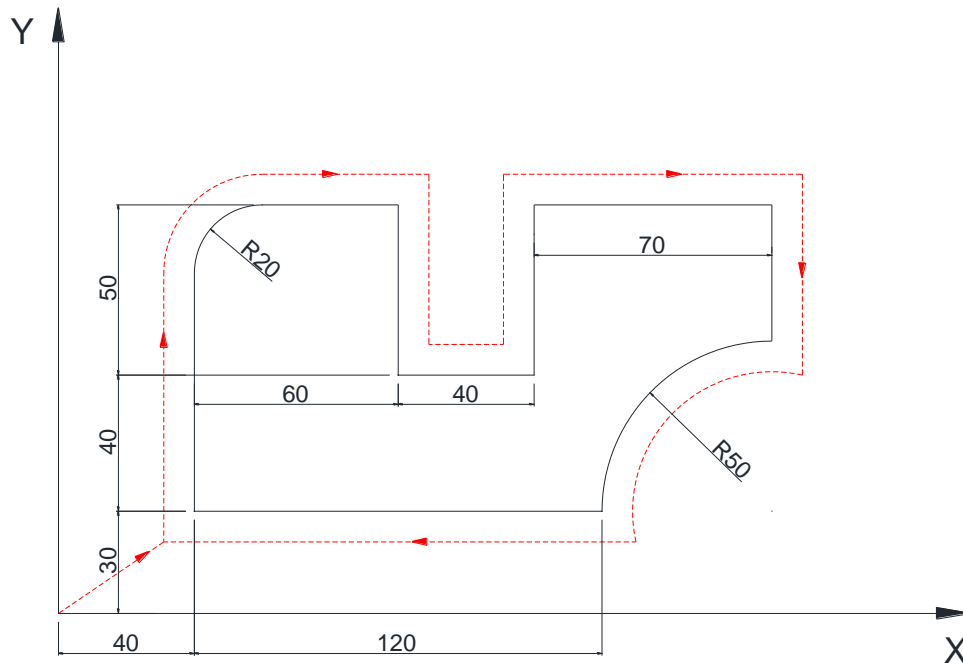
Sketch 3 of Workpiece Machining Process
